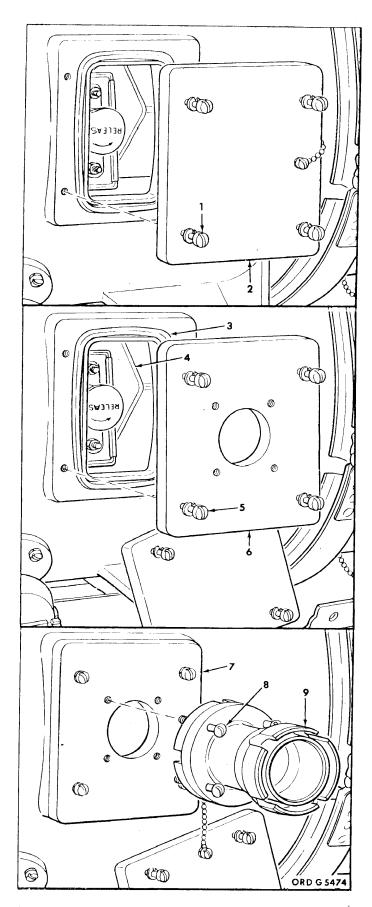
Removal and installation of the cover plate, adapter plate, and hose coupling adapter.
